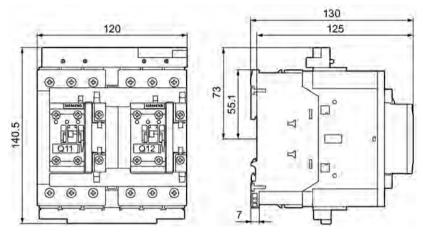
3RA233.-8XB30-1 reversing contactor assemblies
